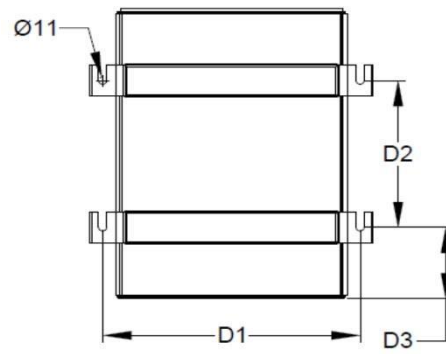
Dimensional drawing of cryogenic component mounting base
